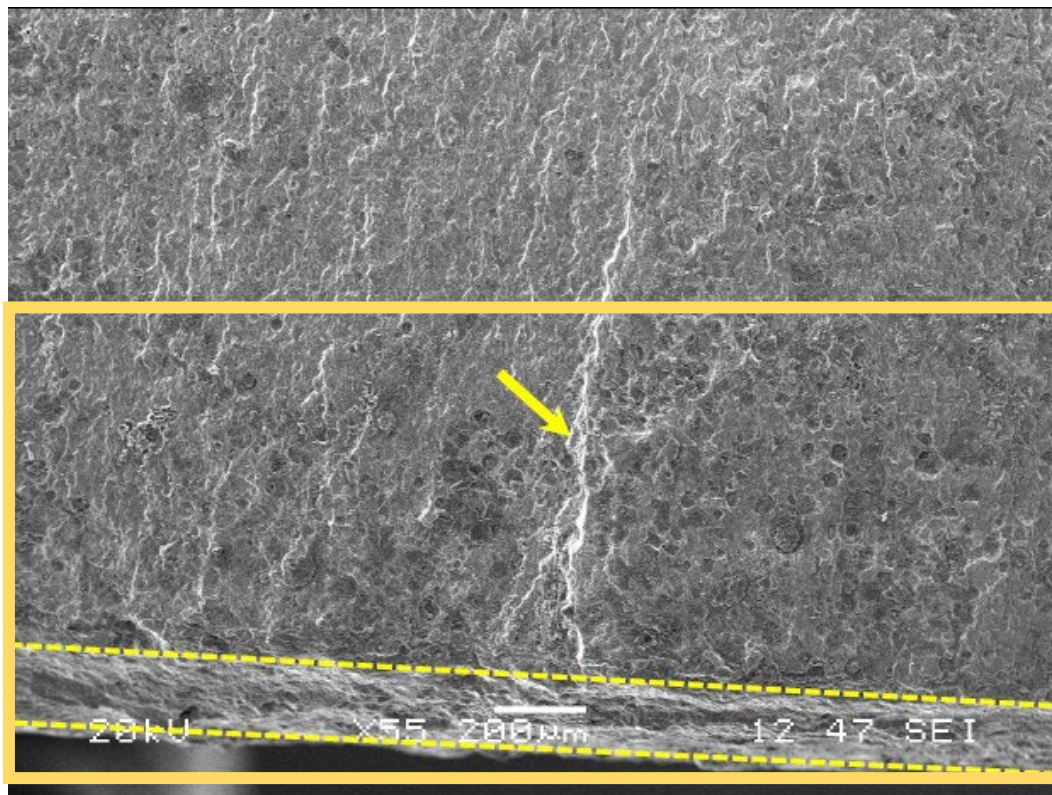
Region on the Crack 1 Fracture Surface with Corrosion Indicating Crack Initiation Early in the Life of the Crack
